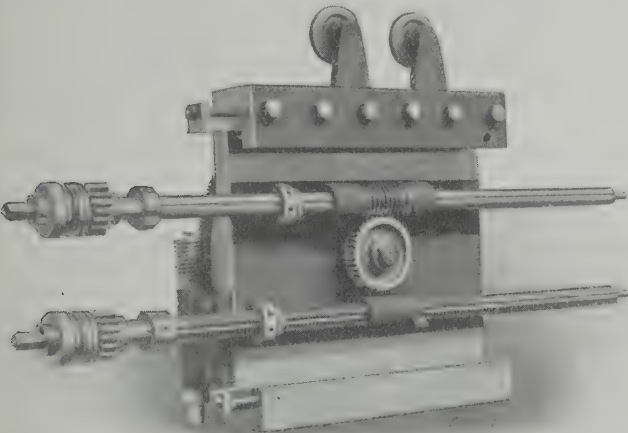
Rear View of Saddle for Swivel Head, showing Large Diameter of Rods and Screws and the Fine Adjusting Collars for the Tool Movements
